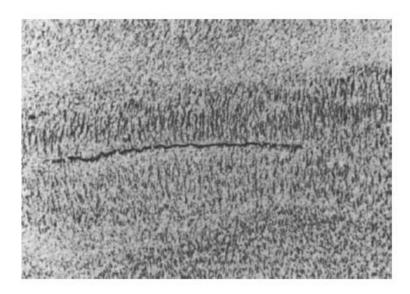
Magnetic particle test indicating longitudinal crack in weld. Available from Halmshaw (1996)
